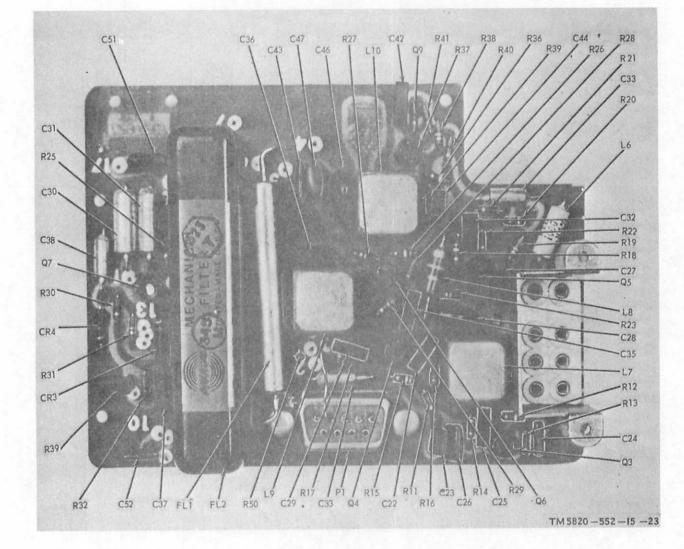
Parts locations, receiver assembly A4A7A1A1 (lower board).
